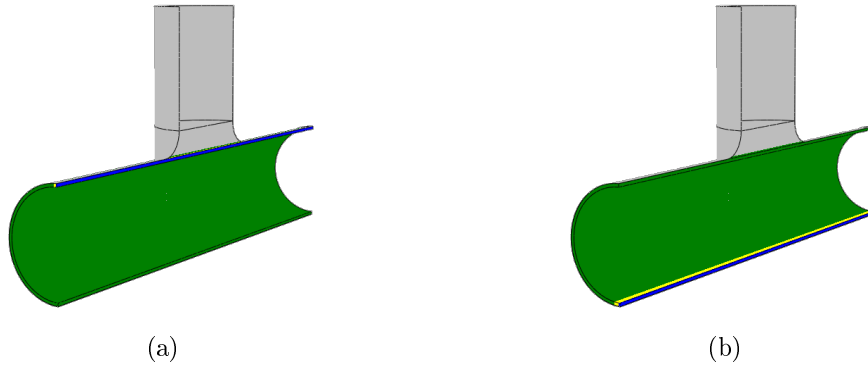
Weld location for the T-shaped tube: (a) top (b) bottom.
